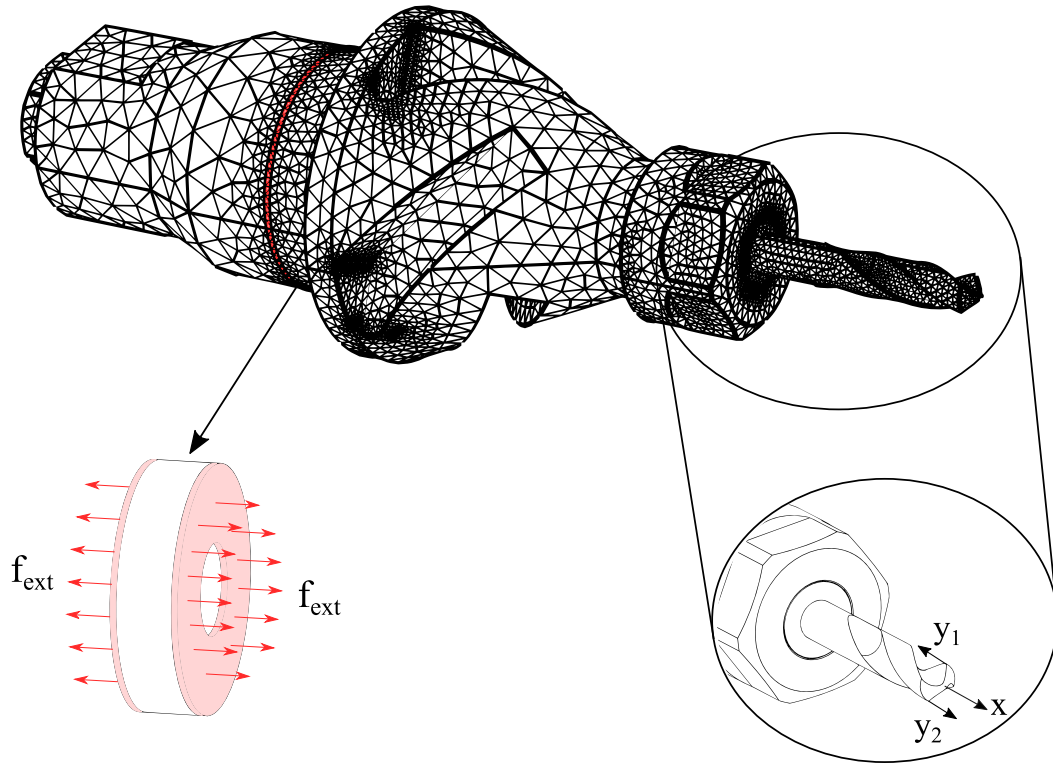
Excitation and measurements of axial-torsional tool holder in COMSOL Multi-physics
